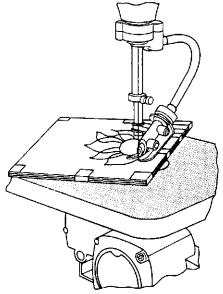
If you need to cut identical parts, stack up the workpieces and tape them together. Cut them all at once. This is called pad sawing.
